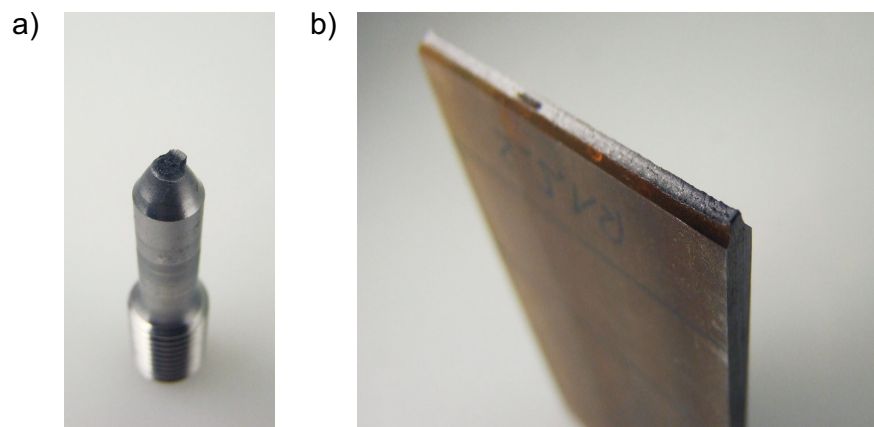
a) Cup-cone fracture surface of a notched round bar b) slanted fracture surface of a notched plane strain specimen.
